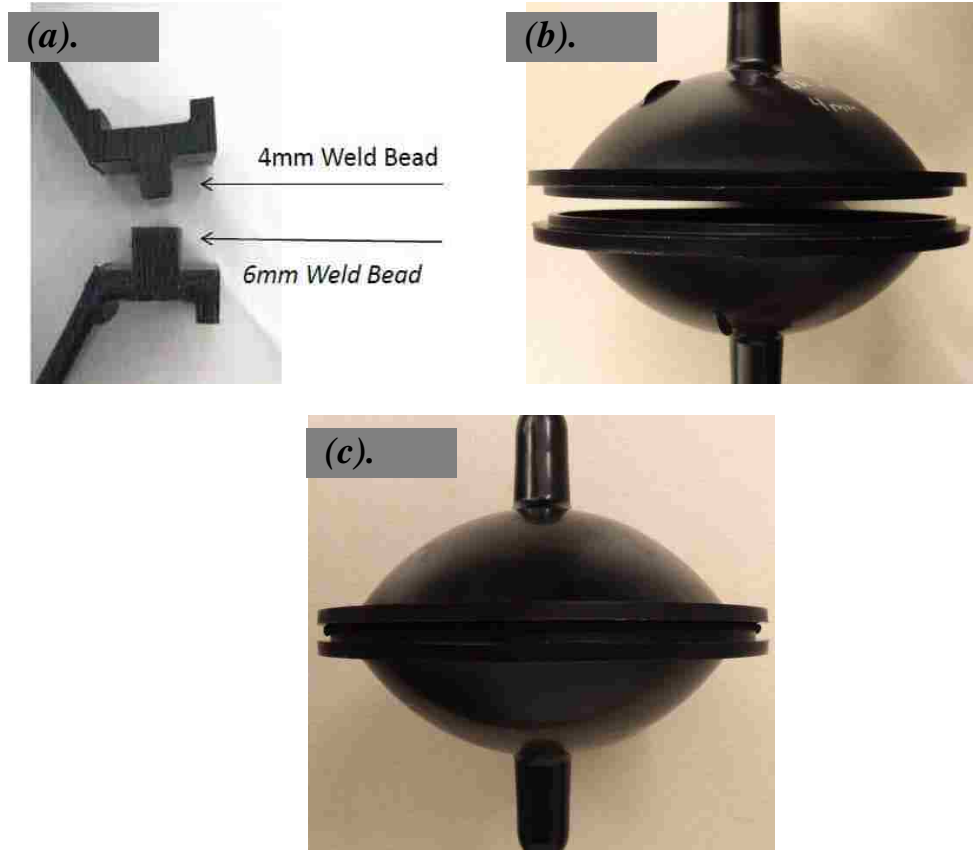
(a). cross-section of the 4mm and 6mm weld bead. (b). un-welded shells (c). welded shells. 4 mm and 6mm weld bead were welded together
